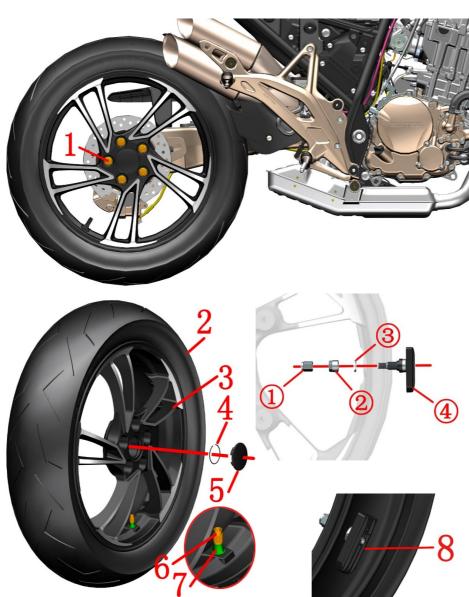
Re	ar wheel, swinging	Rear wheel component	CHK	40)
